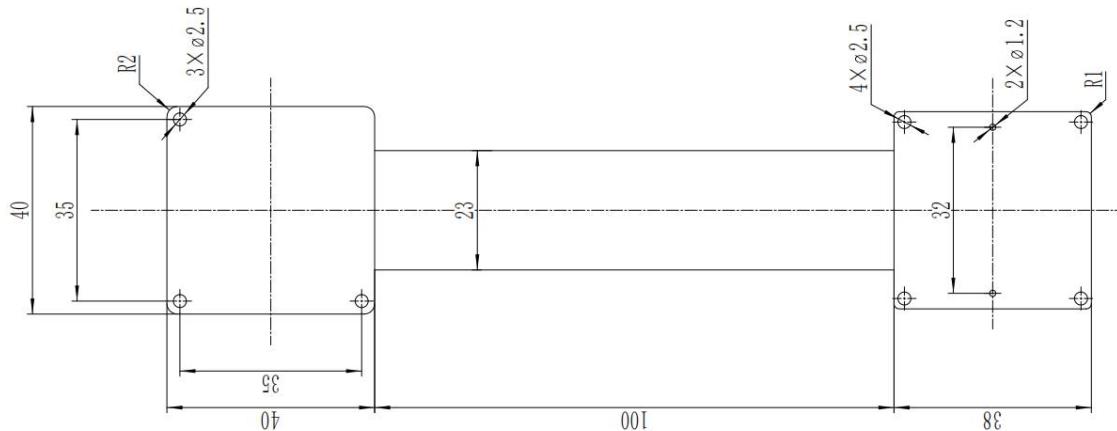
45 Dimensions of OEM1 circuit board (mm)
